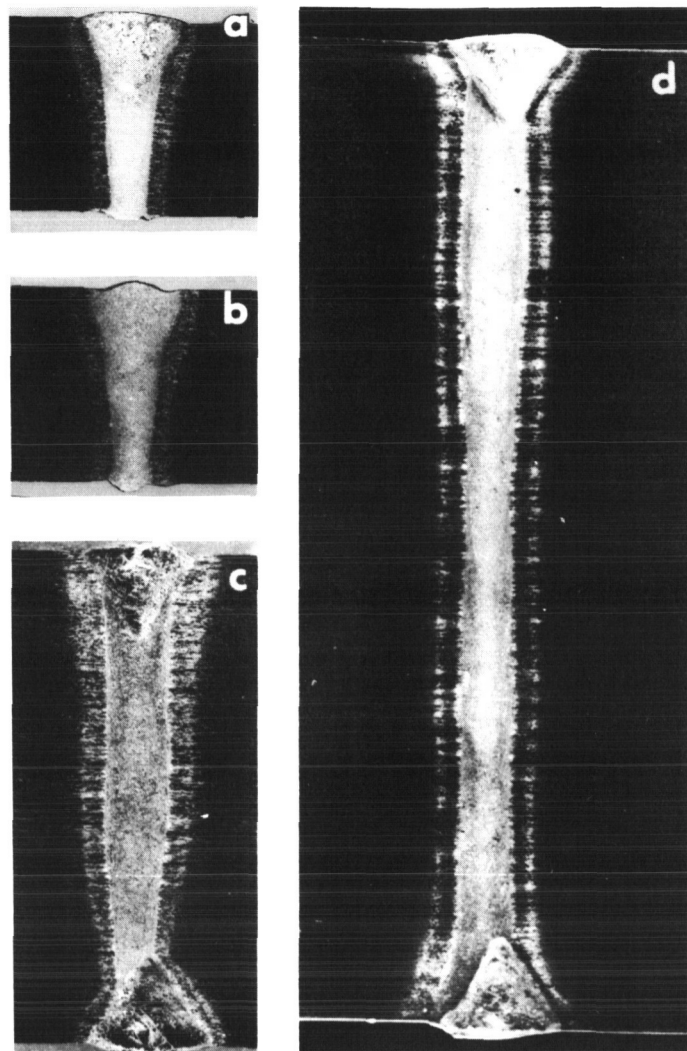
CROSS SECTION (2x) OF EB WELDS IN 1/2-IN. (a) AND (b), 1-1/4-IN; (c), AND 2-3/8-IN; (d), THICK 2219 PLATE WITH ANGULAR SMOOTHING PASSES (a, c, AND d) AND WITHOUT A SMOOTHING PASS (b).
